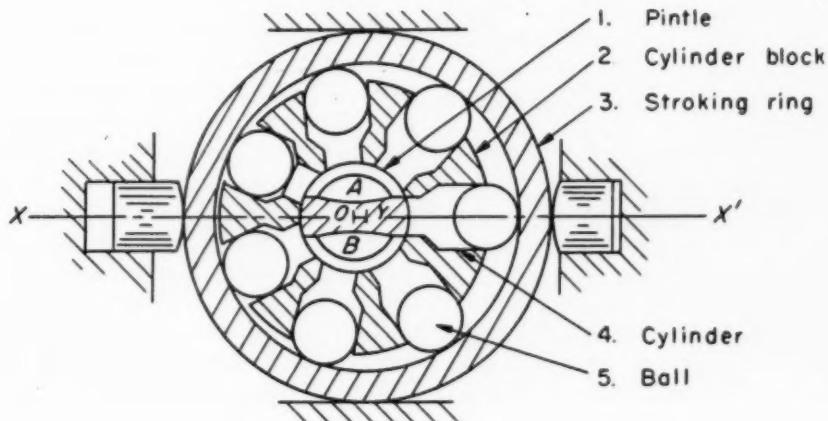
Ball piston servo pump and electro-hydraulic stroke control produce rapid changes in hydraulic output
